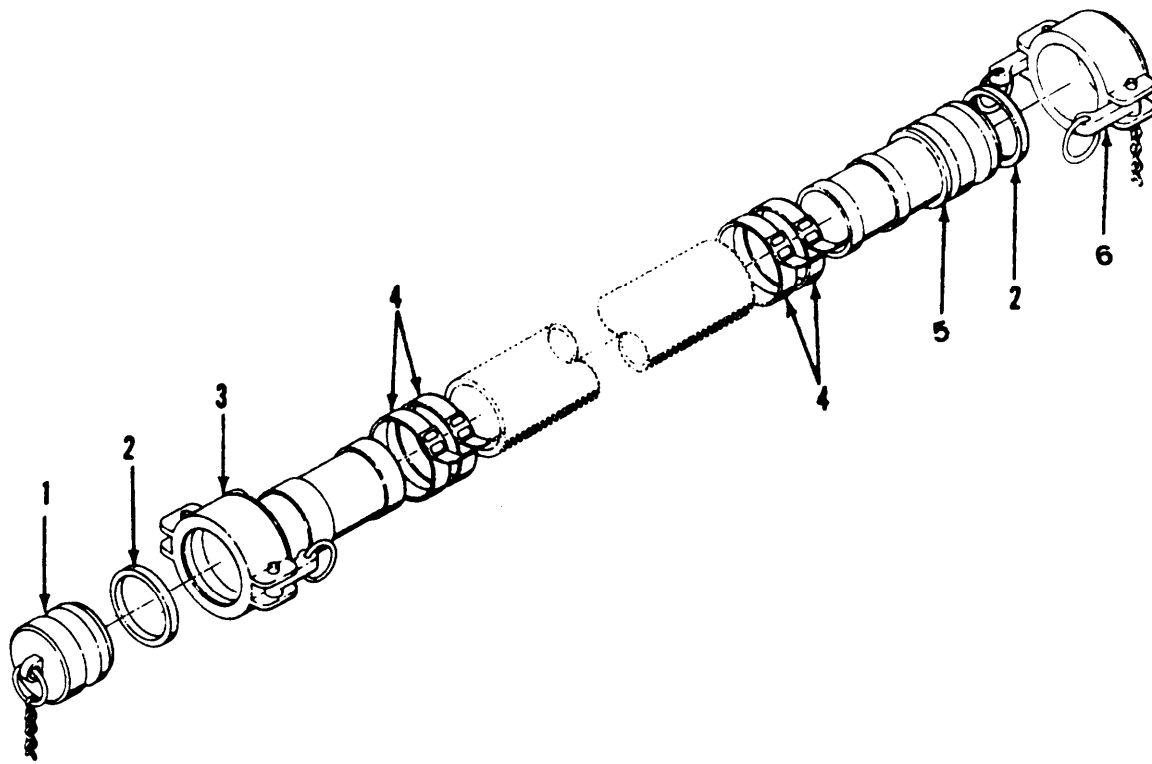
Discharge Hose Assembly, 3 In. X 25 Ft.
